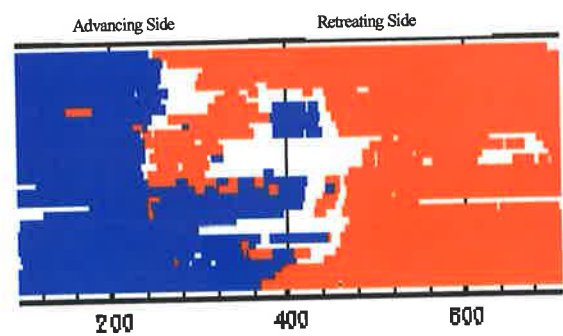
Interface Between Advancing and Retreating Side for a Hot Weld
